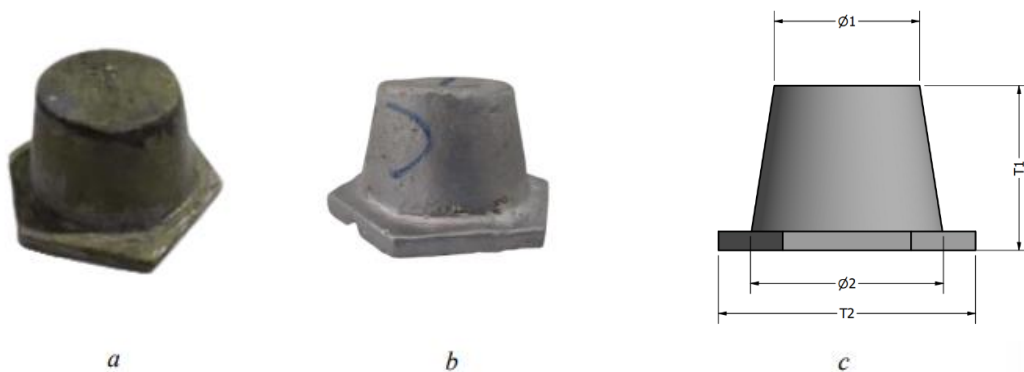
Ashtray pattern (a) Casting Product (b) CAD Design (c)
